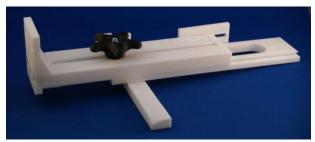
3D printed router jig used to cut V channels in base. Printed in 2 parts because it was too large for my printer.
